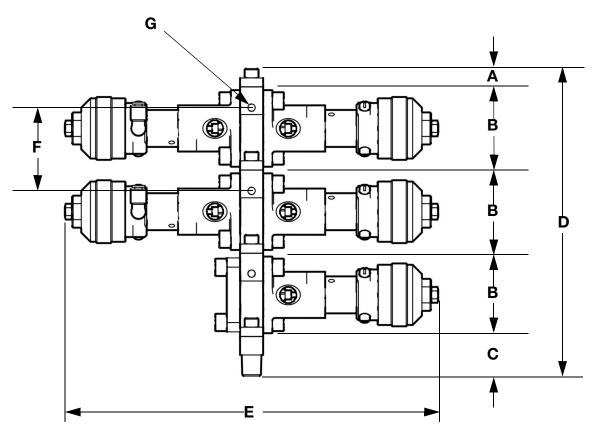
High Pressure Valve Stack Dimensions - Series B
